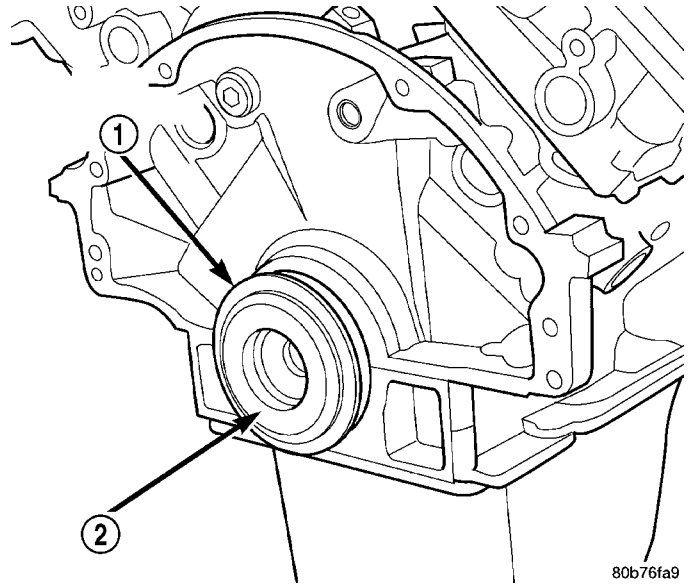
Crankshaft Rear Oil Seal Guide Special Tool 8349-2 and Oil
